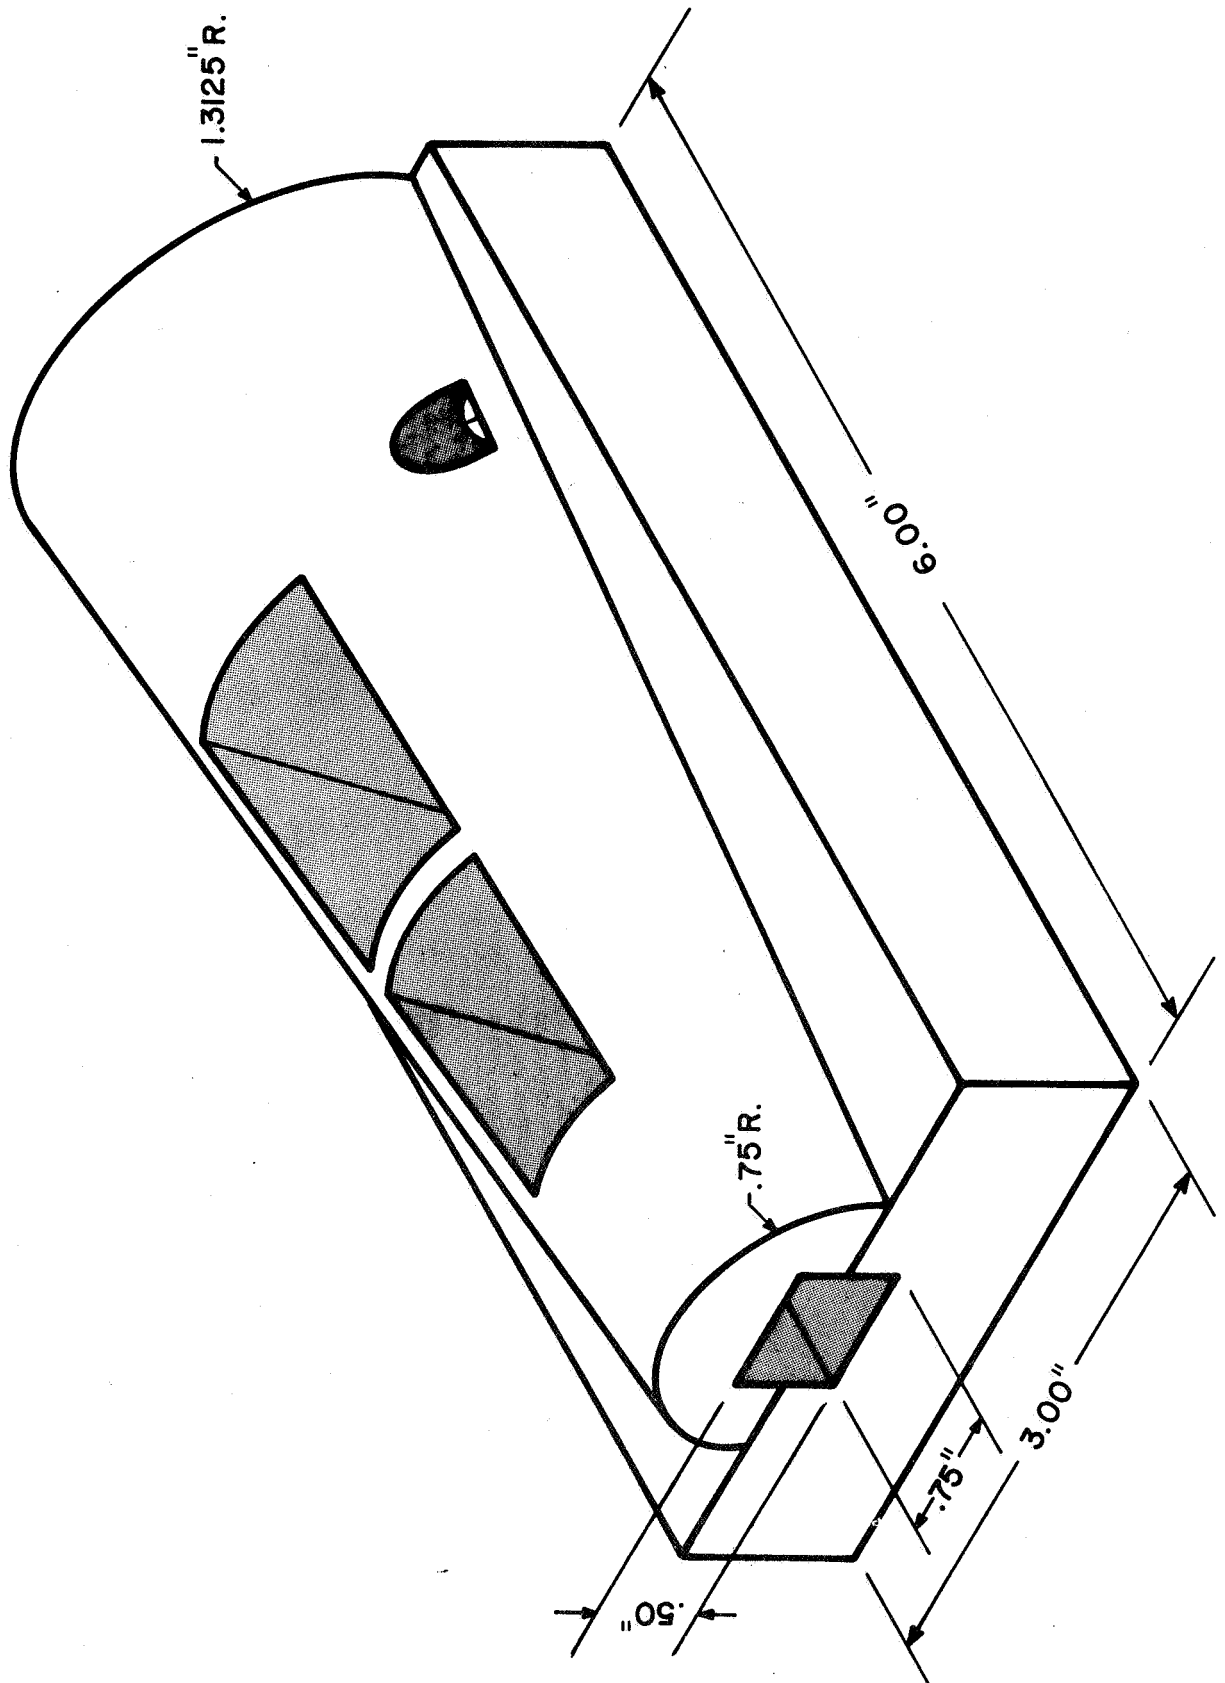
B. Cross-Sectional View of the Prototype Assembly (One-Half Scale)
